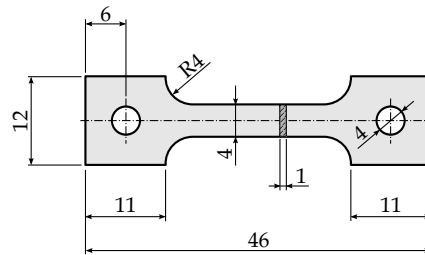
Load cell designed and built for the MM1 testing machine
